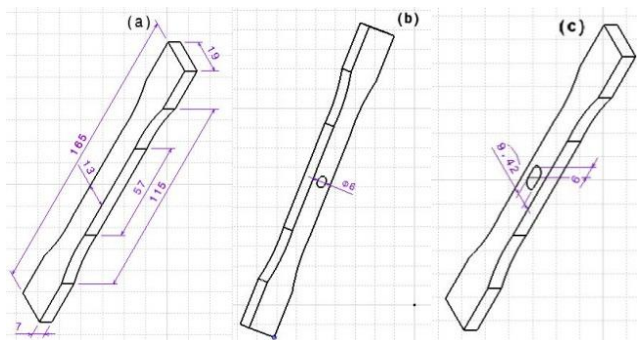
(a) Undamaged specimen, (b) specimen with hole and (c) specimen with elliptical notch
